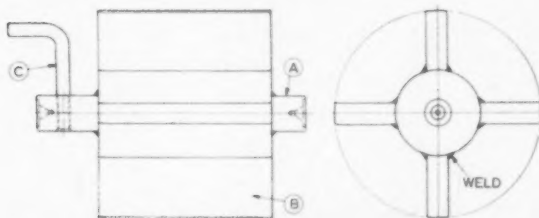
Finned mandrels while not applicable to every large component, are useful on a rotary grinding machine because they make handling so much simpler. They also provide a use for old solid mandrels.
